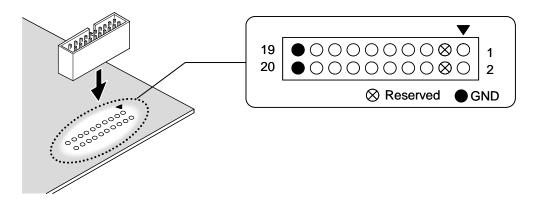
Pin Layout for Extended Connector Control Board
